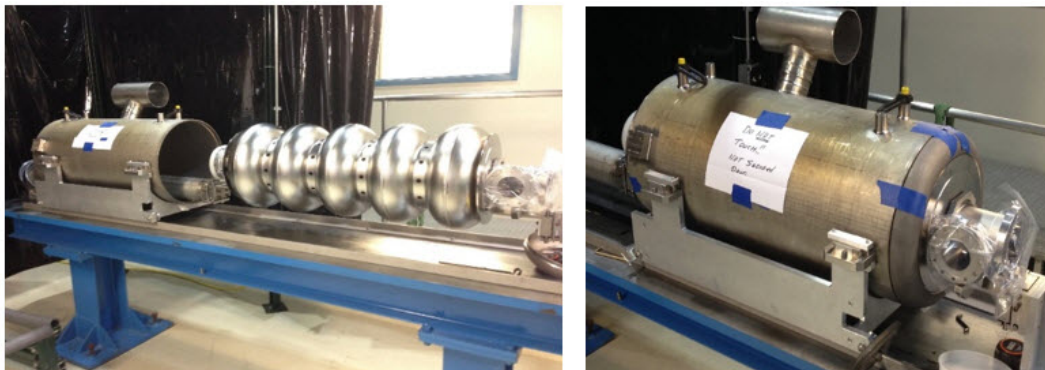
HB650 helium vessel welding procedure prepared with a successful mock-up test.
